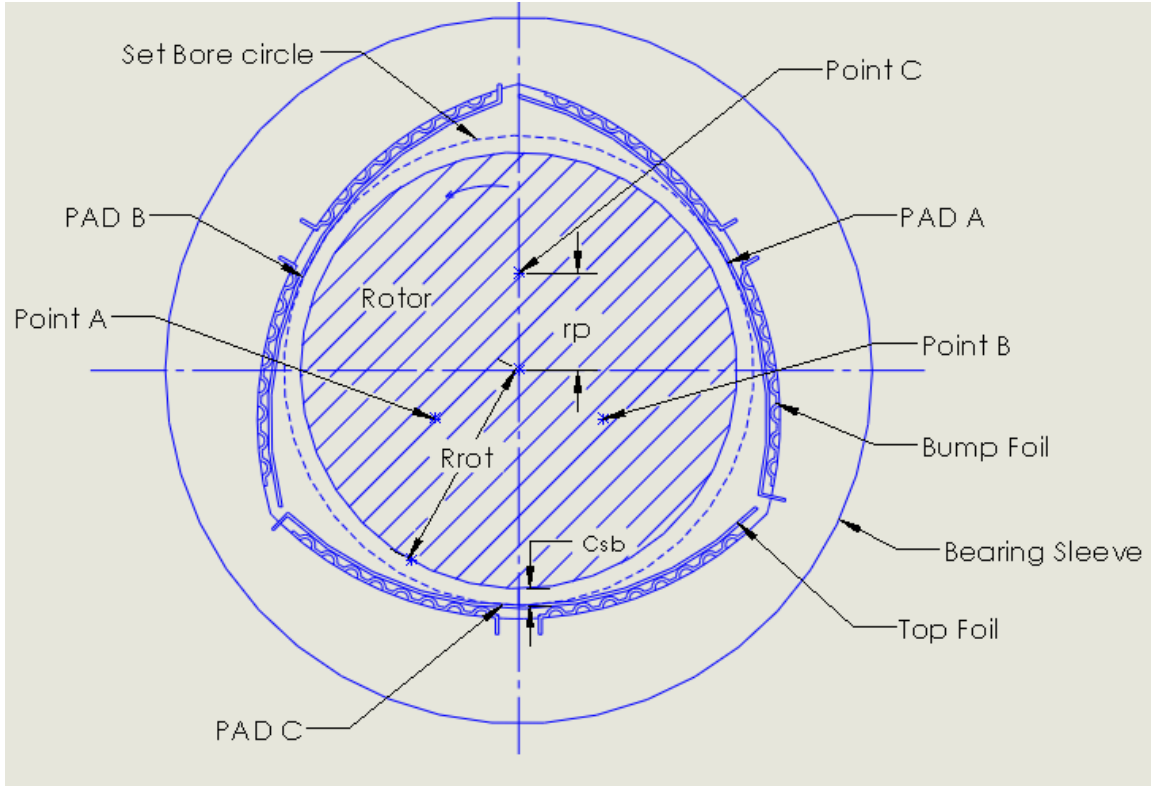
Schematic of a HAFB showing preload, set bore clearance and pad configuration
